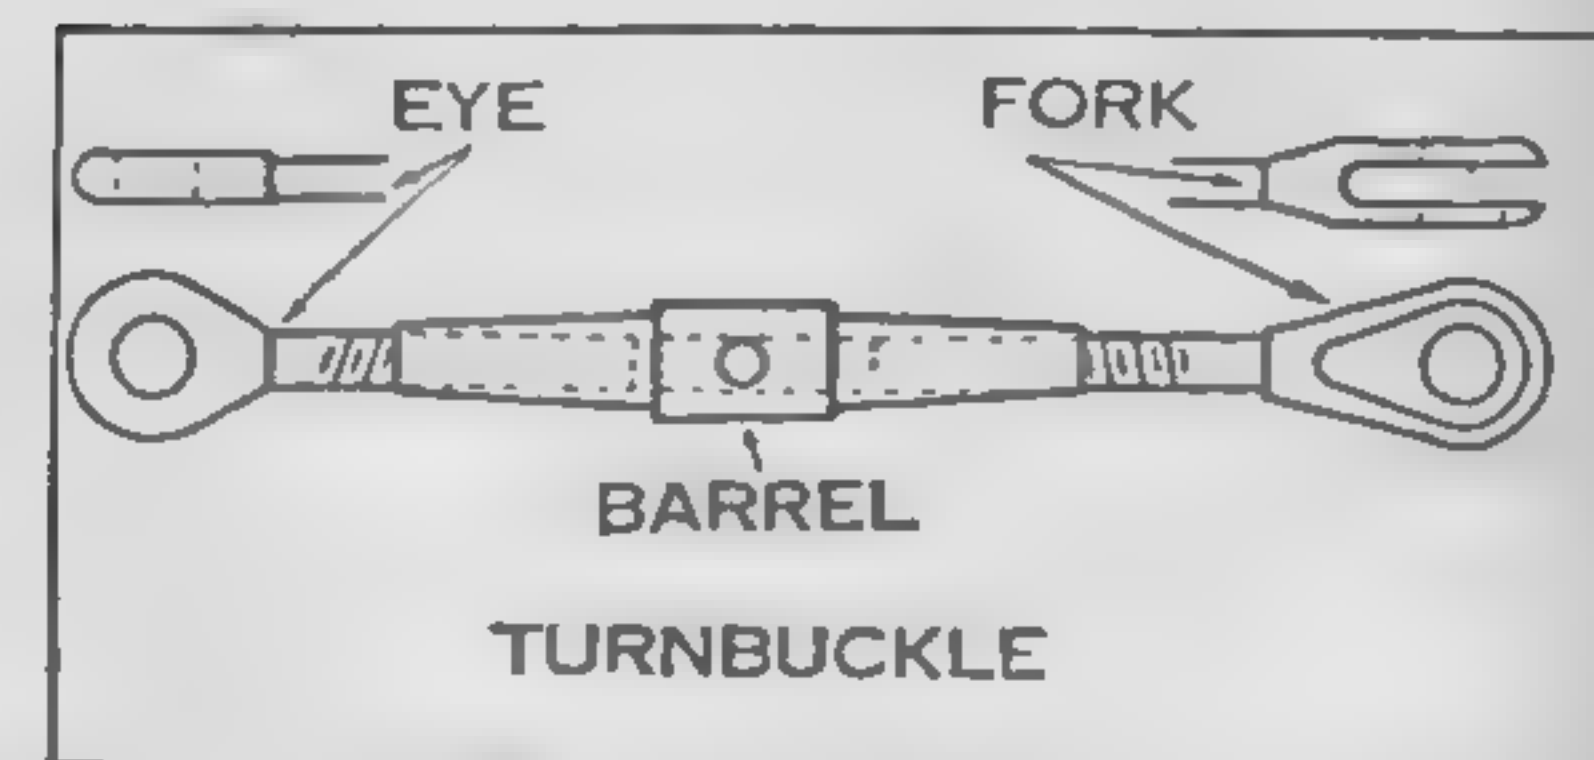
When Turnbuckle Is in Place, All Threads Should Be Covered
